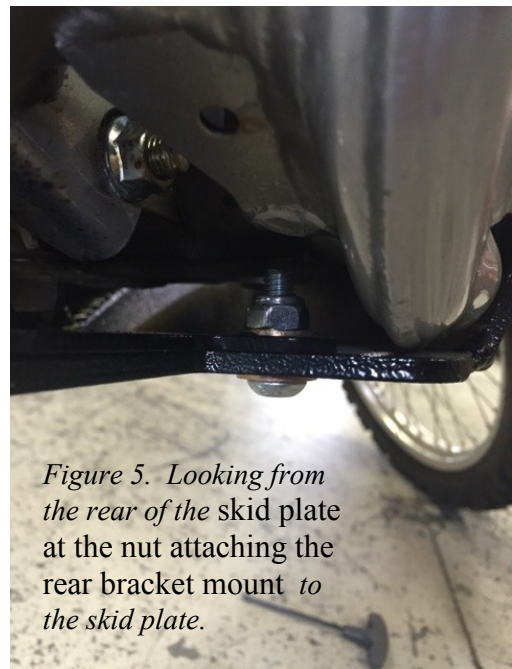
Looking from the rear of the skid plate at the nut attaching the rear bracket mount to the skid plate.
